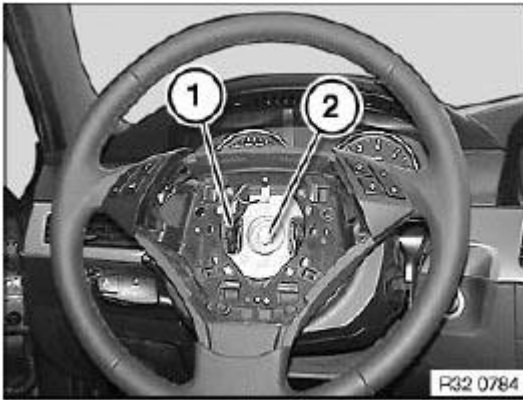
Identifying Plug Connection And Steering Wheel Screw
